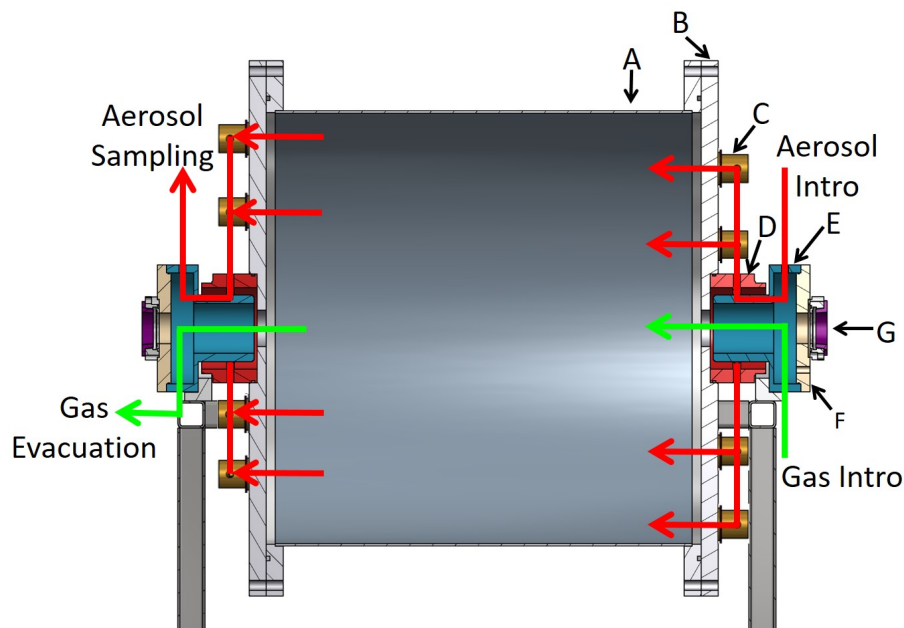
Cross-sectional assembly drawing of the chamber design. Part A is the 222.4 L main chamber. Part B is the faceplate modified to mount four aerosol ports (C) and the axle (D). The stationary fixed tube (E) has six male VCR ports equally spaced around the larger diameter section. The CRDS optical mounts for the highly reflective mirrors (G), RH/T probe (not pictured here), and pressure gauge (not pictured here) are attached to the end plate (F) on the gas evacuation side of the chamber. Newly generated aerosols flow through a 90° tube welded between the vertical introduction port and a hole bored in the smaller diameter section of the tube extension, which is aligned with a separate channel in the axle. The ports (C), connected to the axle via stainless steel tubing, are located at radii of 5 in, 7 in, 9 in and 11 in. Background and analyte gases flow through ports on the tube extension and into the main chamber through a 2 in hole in the faceplate.
